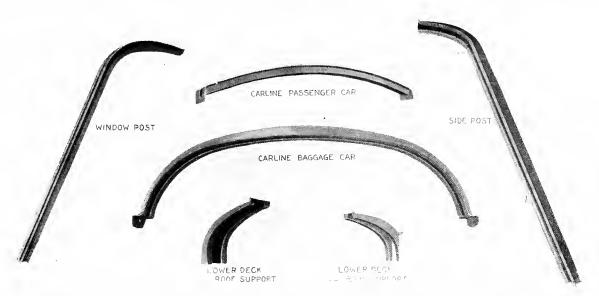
Pressed Steel Shapes for Passenger Train Car Framing. Cleveland Car Specialty Company.
